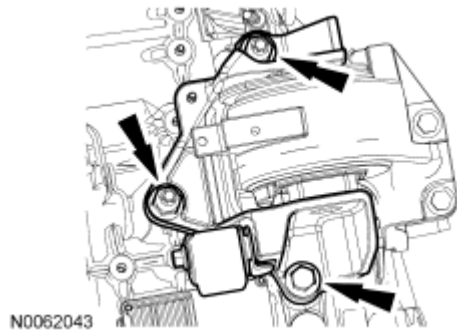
Identifying Transaxle Mount Bracket Bolt
